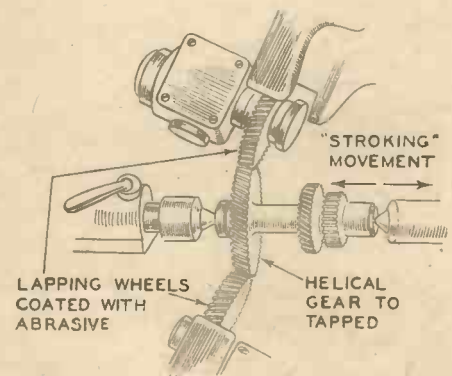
The final finishing is often carried out by lapping the gear wheel in conjunction with two or sometimes three cast iron wheels which are coated with an abrasive compound. An end-to-end movement of the gear wheel is usually provided in order to distribute the abrasive
